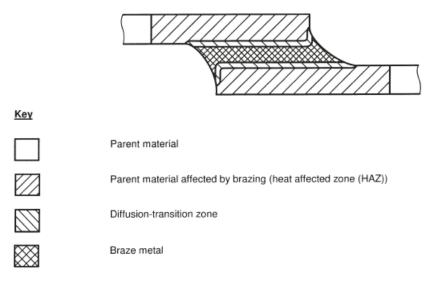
Schematic of a brazed and soldered joint (taken from EN ISO 18279:2004)
